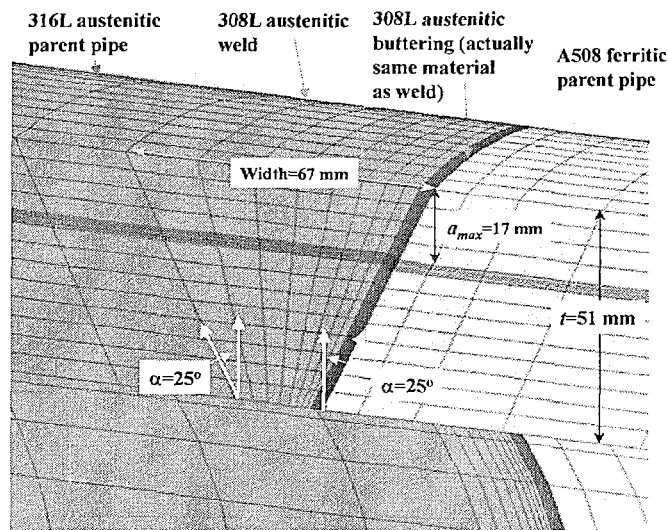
Close-up of mesh near initial 17 mm deep defect in dissimilar metal weld buttering
